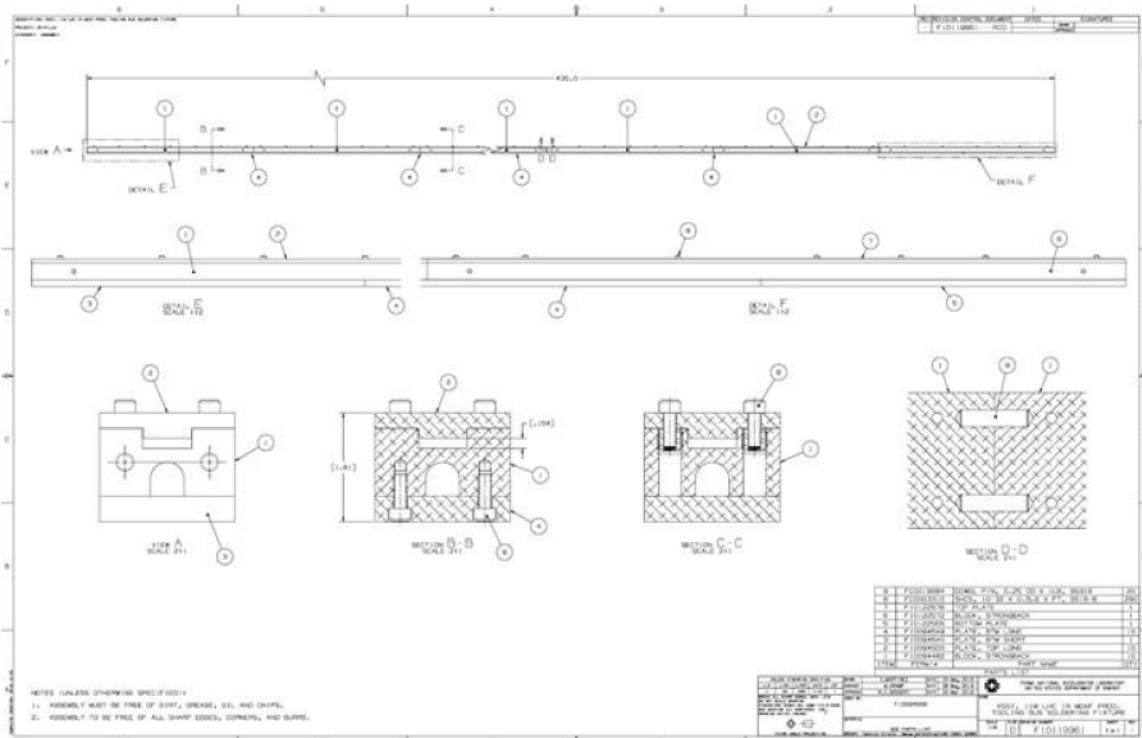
Bus Soldering Fixture for Q1/Q3 and Q2 busses.
